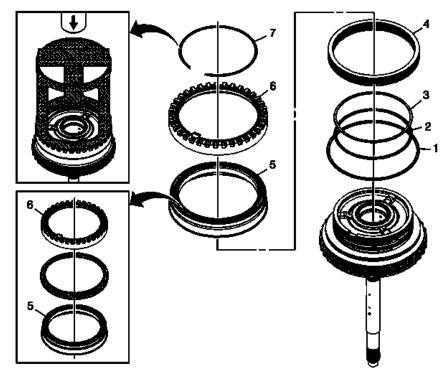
Identifying 3-5 Reverse Clutch Plates Courtesy of GENERAL MOTORS COMPANY
